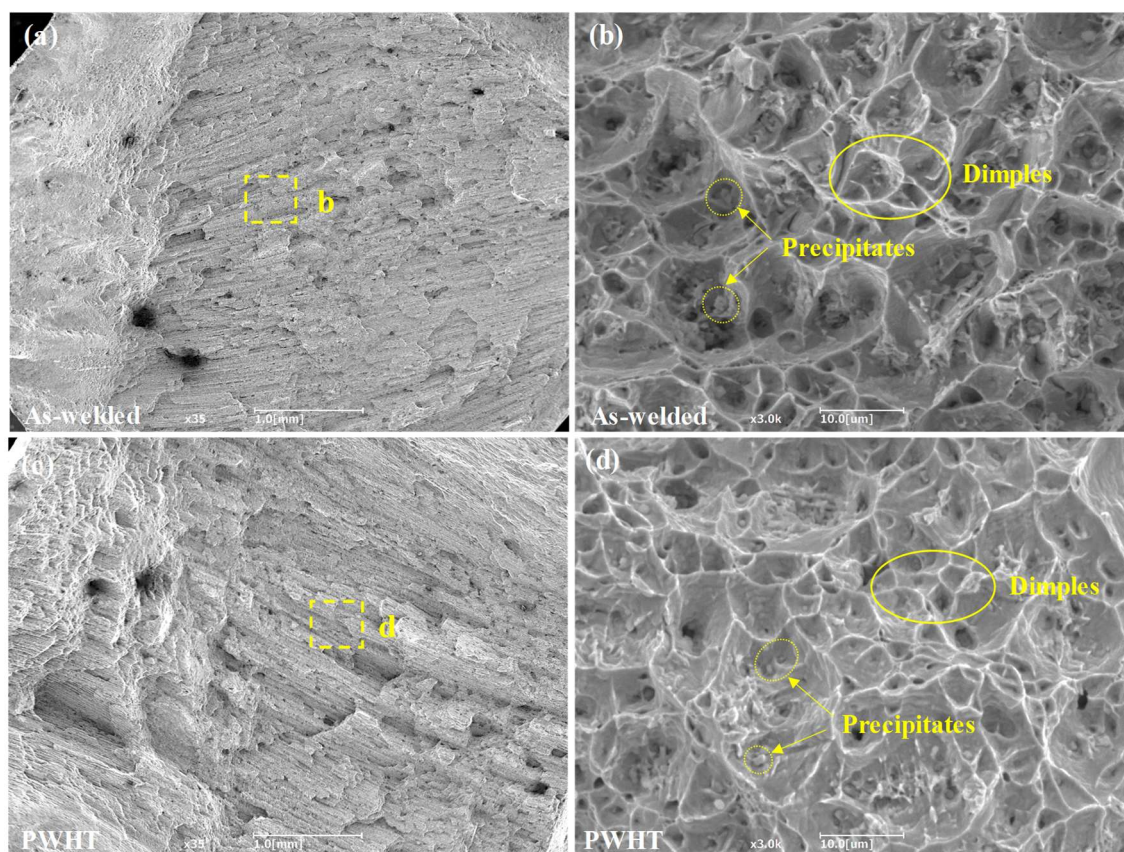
Fracture surfaces of tensile samples: (a, b) as-welded condition; (c, d) PWHT condition.
